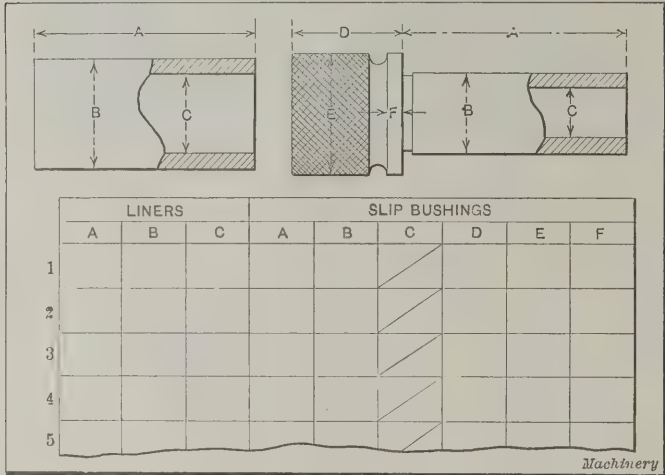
Arrangement of Table of Jig Bushing Dimensions
